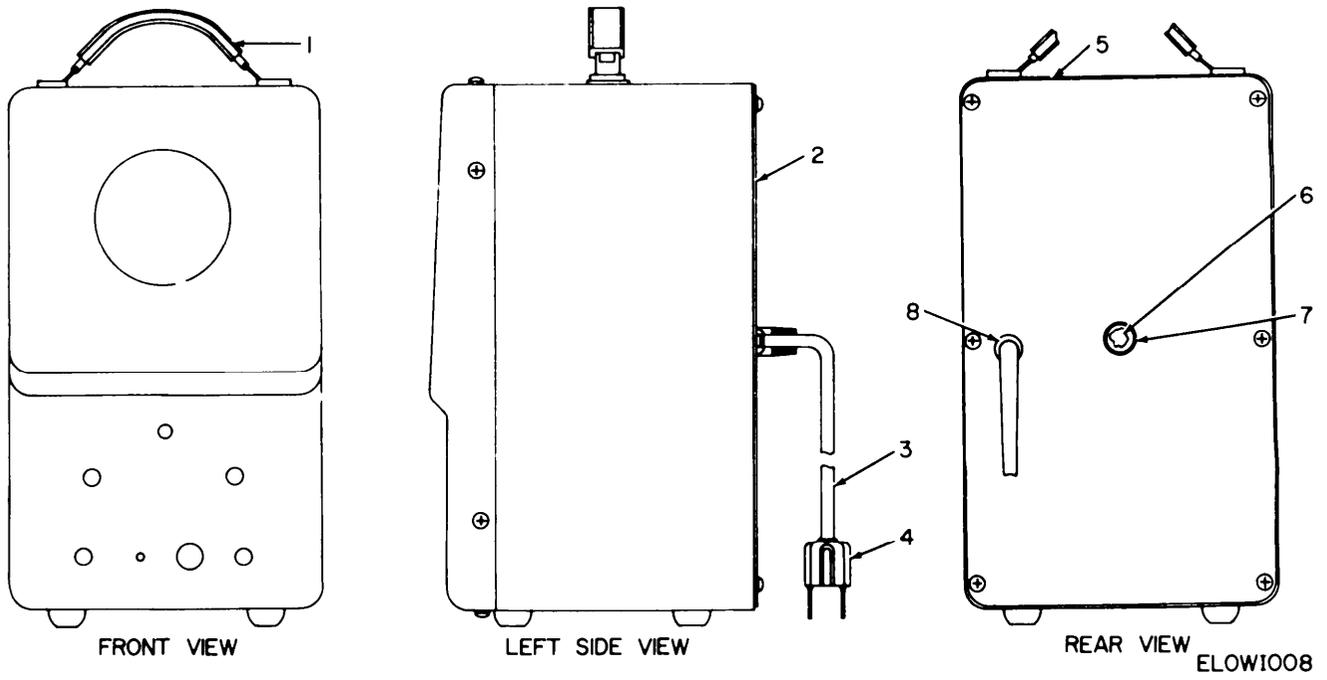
Voltmeter, Electronic ME-227/U, Housing Assembly.
